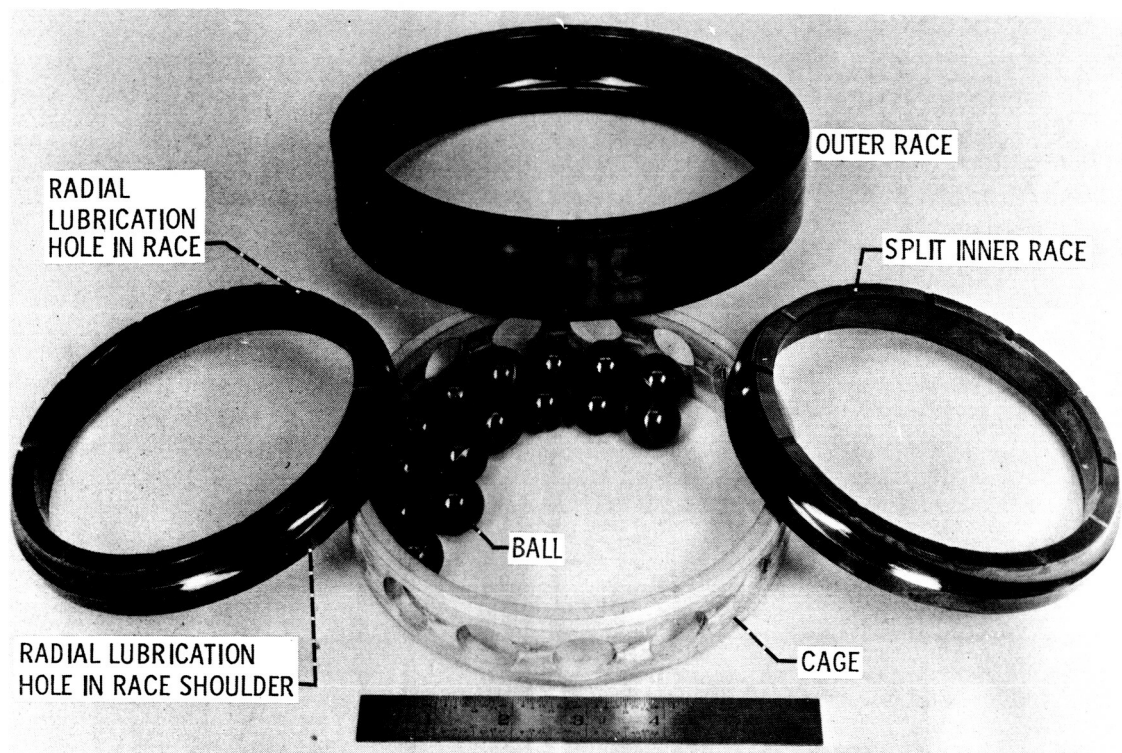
Unfailed 120-mm bore angular-contact high-speed test ball bearing. Running time, 1000 hours; speed, 25 000 rpm (3 million DN); temperature, 492 K (425° F); thrust load, 22 241 N (5000 lb).
